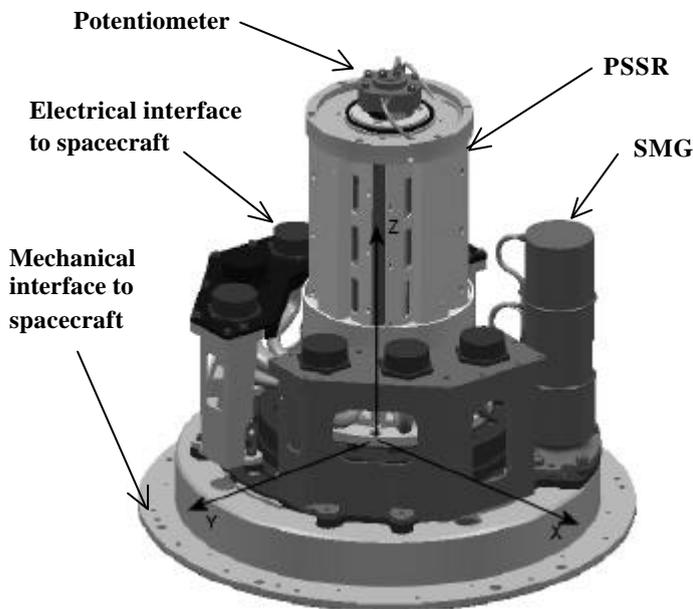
E3000 SADM showing the arrangement of the piece parts on the spacecraft side.
